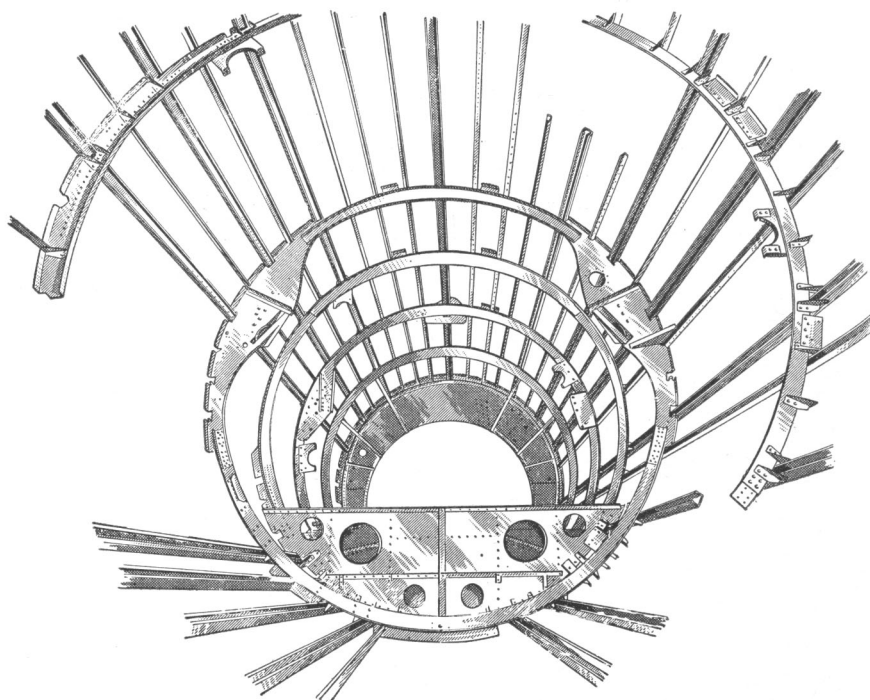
Skeleton view of part of a B-29 Superfortress fuselage, showing circumferentials and stringers prior to installation of the skin. The lighter stringers are L-shaped; the heavier ones are U-shaped.
